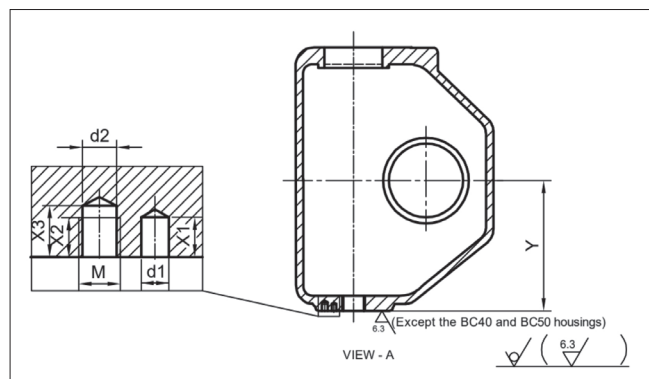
Locations for Additional Machining of Housing for Angle Plate
